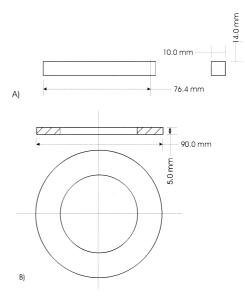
Drawing and dimensions of the cast pieces for impactresistance testing with the gating and risering systems
